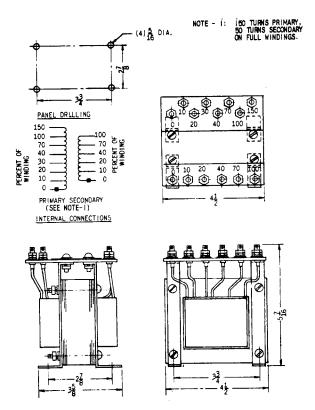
(0367A0267-2) Outline and Panel Drilling Dimensions of the Auxiliary Transformer used with the GCXG53A Relay
